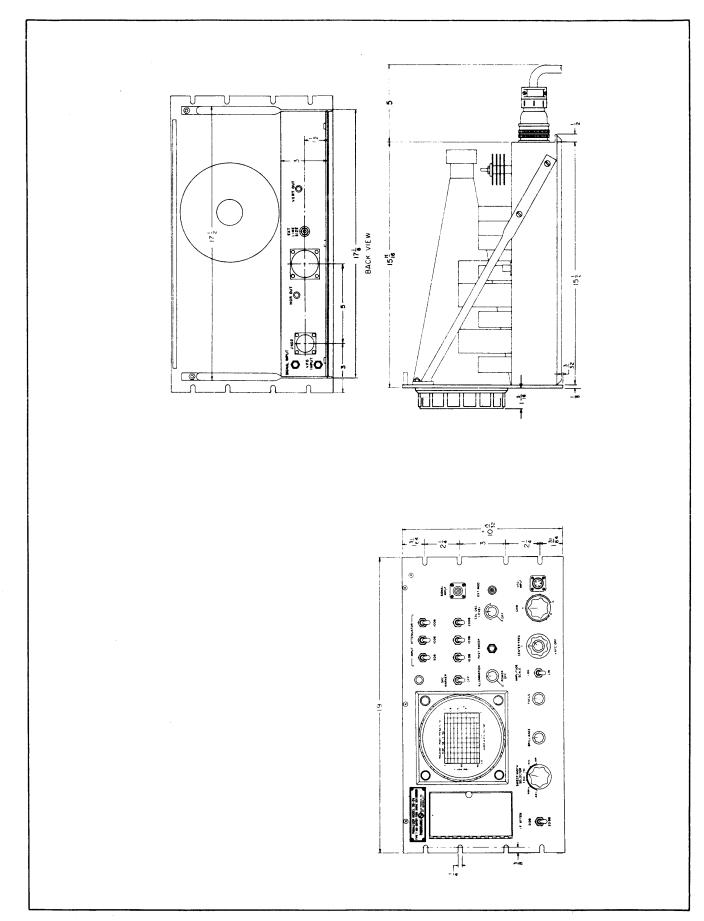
Outline Dimensional Drawing, Model SB-12a, Rack Mount Style.
